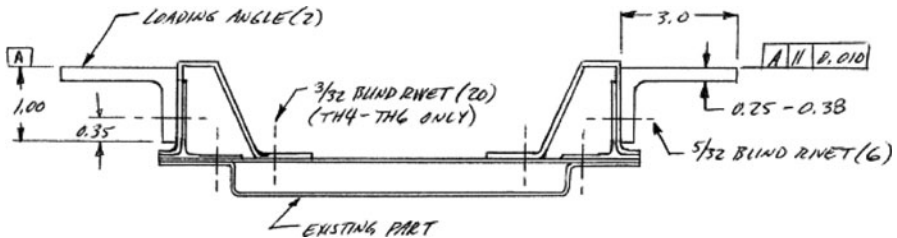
Bolted/bonded tee/hat sub-element fatigue test specimen
